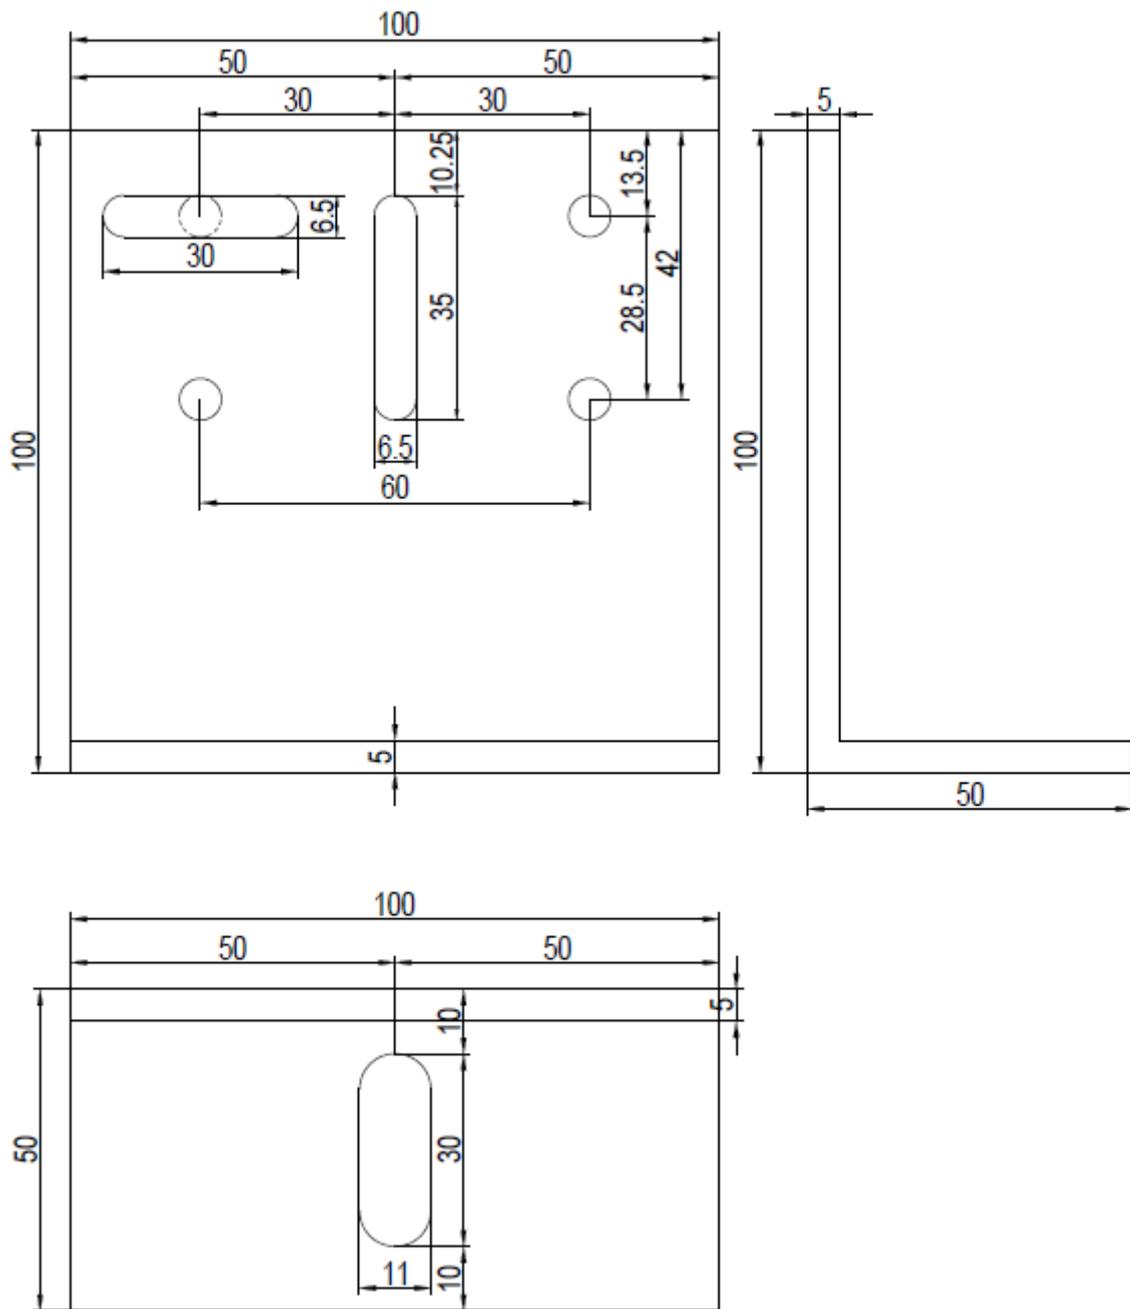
Support and fixing bracket CRM.01 – 100 mm
